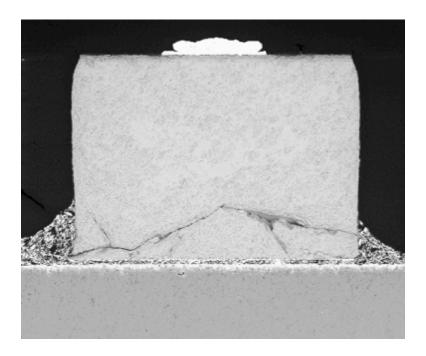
These die cracks are the cause of the intermittent LED failure. [162X ref. $305A_2$]
